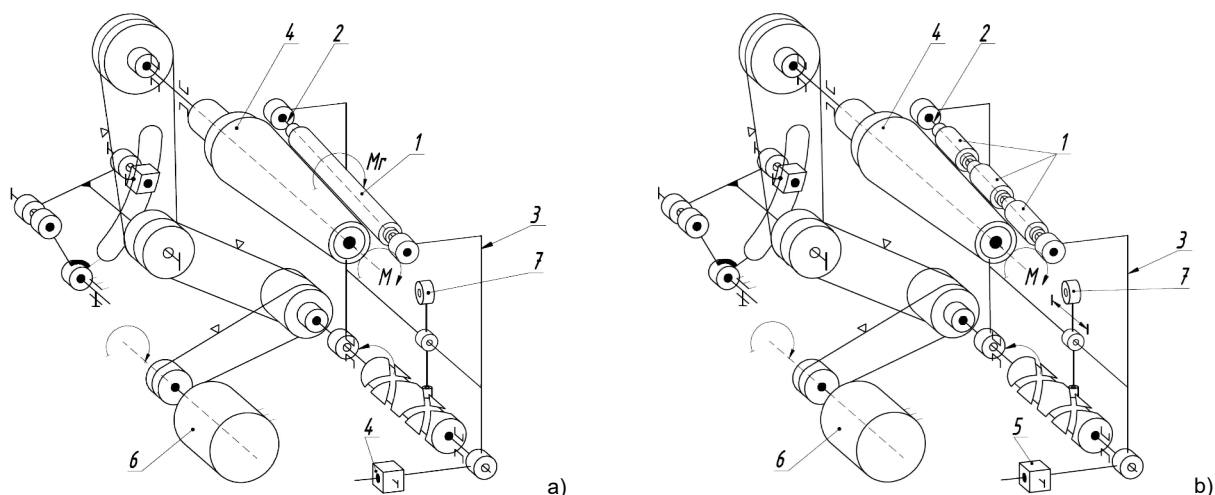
Kinematic-schematic diagrams of the winding mechanism of the rewinding machine: a) basic design of the BP-340 machine, b) new design [1]. 1 - the rolling roller, 2 - the axis, 3 - the rocker arm, 4 - the bobbin with packing, 5 – the counterweight, 6 - the electric motor, 7 - the mechanism of the distributor
